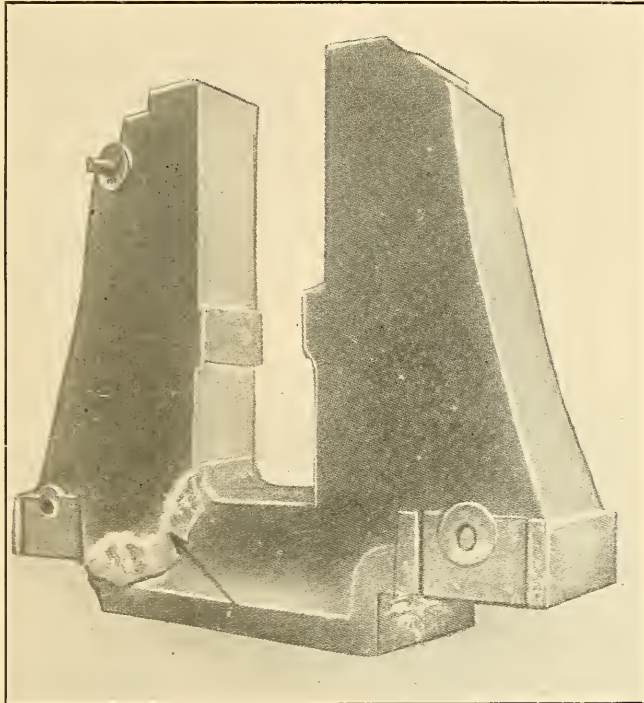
Weld on 48-In., 68 000-Lb., Cast Iron Blooming-Mill Housing. About 3500-Lb. of Railroad Thermit Used.
